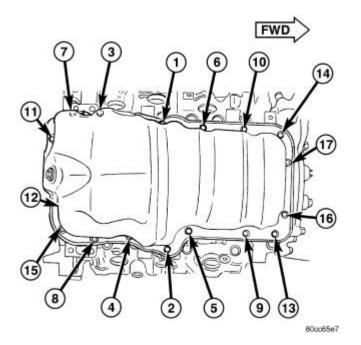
Oil Pan Mounting Bolt Sequence Courtesy of CHRYSLER LLC
